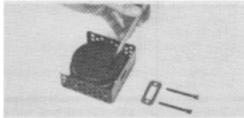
Check port area on muffler assembly for excess carbon deposits.
